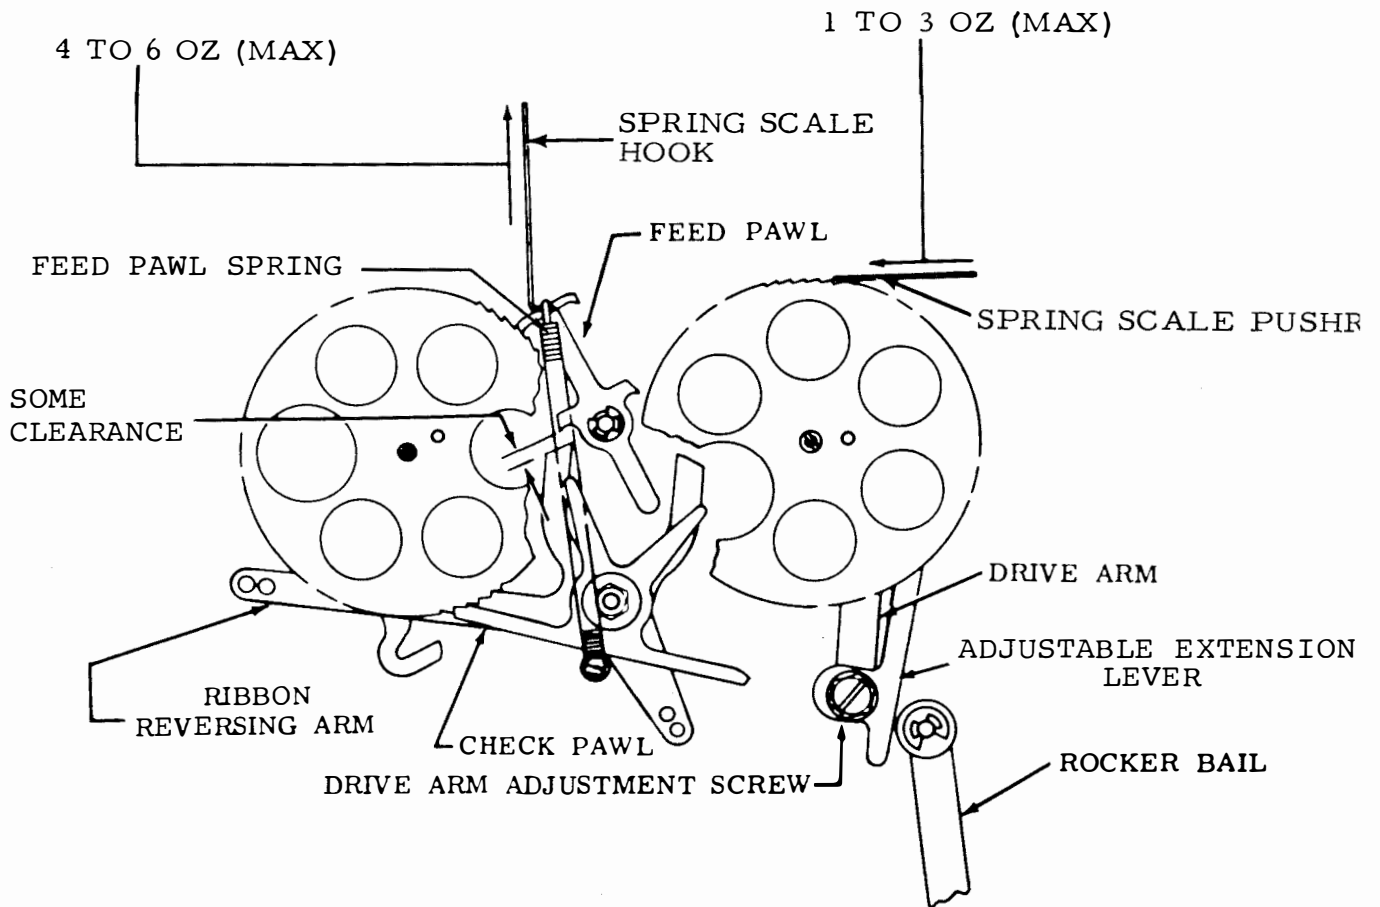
Drive Arm, Feed Pawl Spring, and Ratchet Wheel Torque Spring, Front View
